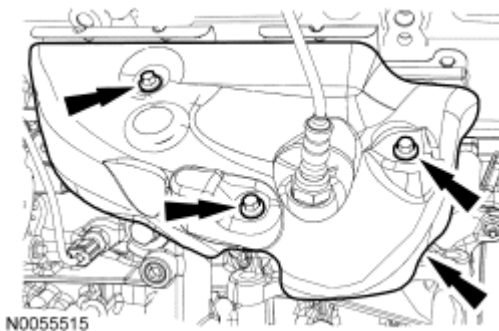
Locating LH Exhaust Manifold Heat Shield & Nuts
